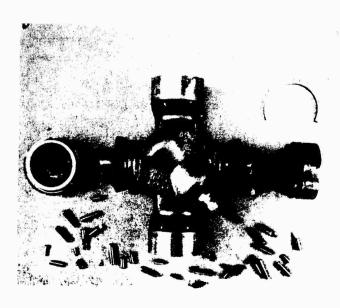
Broken Race and Rollers of Right-Rear Wheel-Drive Shaft Inboard Universal Joint On M151Al after 4155 Test Miles.
